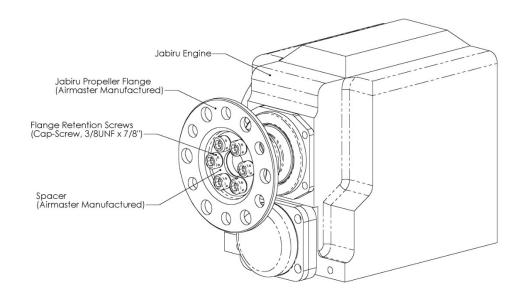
Airmaster Manufactured Flange Installed on Jabiru Engine (example shows standard flange without prop extension)
